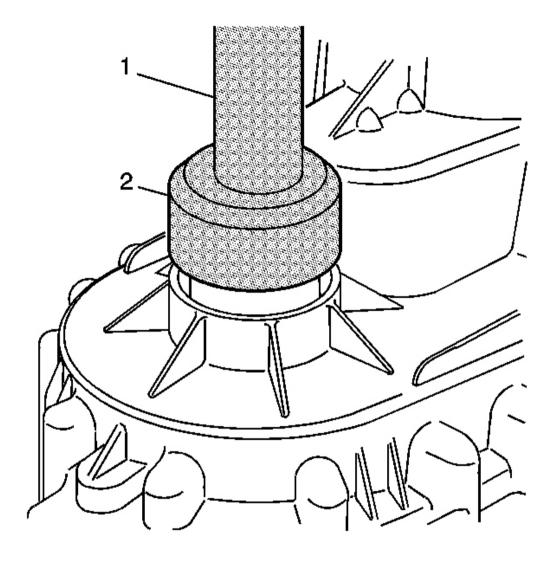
Using J 43484 & J 8092 To Install Transfer Case Output Seal Courtesy of GENERAL MOTORS CORP.
